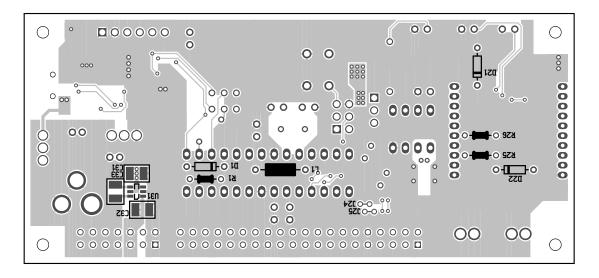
ZB2 Bottom Side Assembly Drawing (Rev 0)
